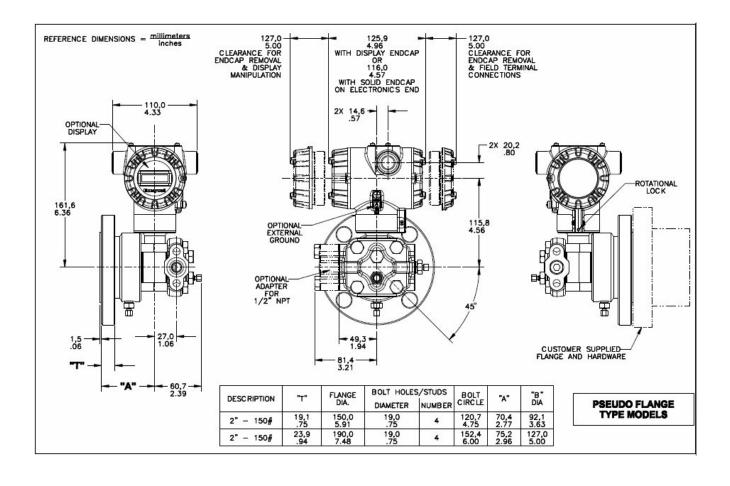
Typical mounting dimensions for pseudo flange type models STF72F, STF73F, and STF74F.
